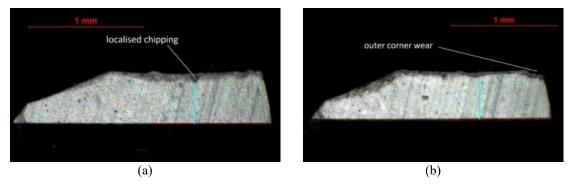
Wear of the tool under dry/no coolant drilling after second hole: (a) side 1 and (b) side 2
